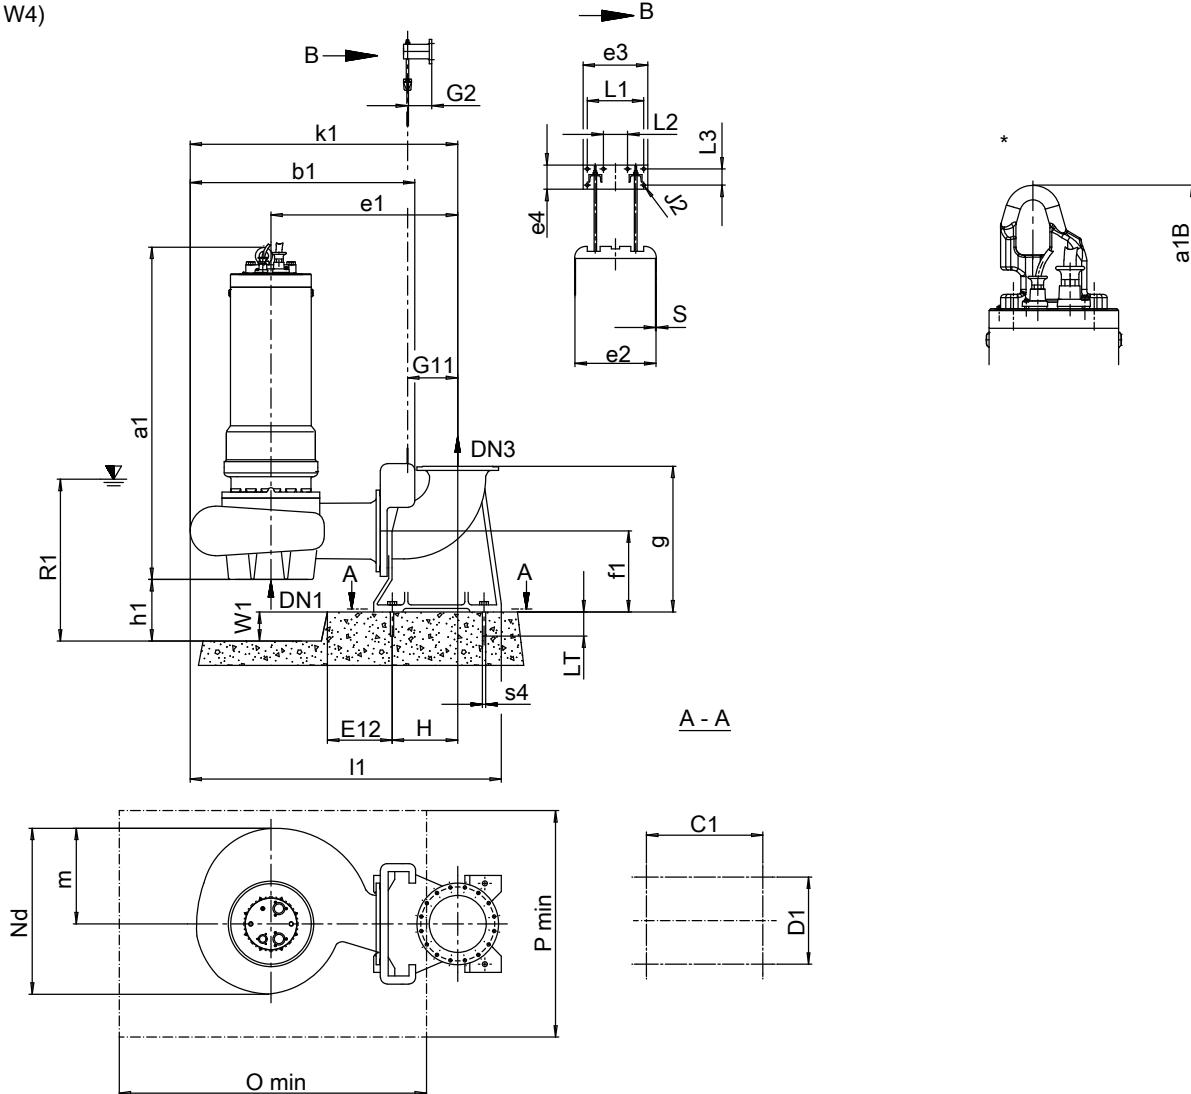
General arrangement drawing W4, stationary on duckfoot bend, guide wire arrangement, foundation with step, without foundation rail, large upper holder, motor version N
